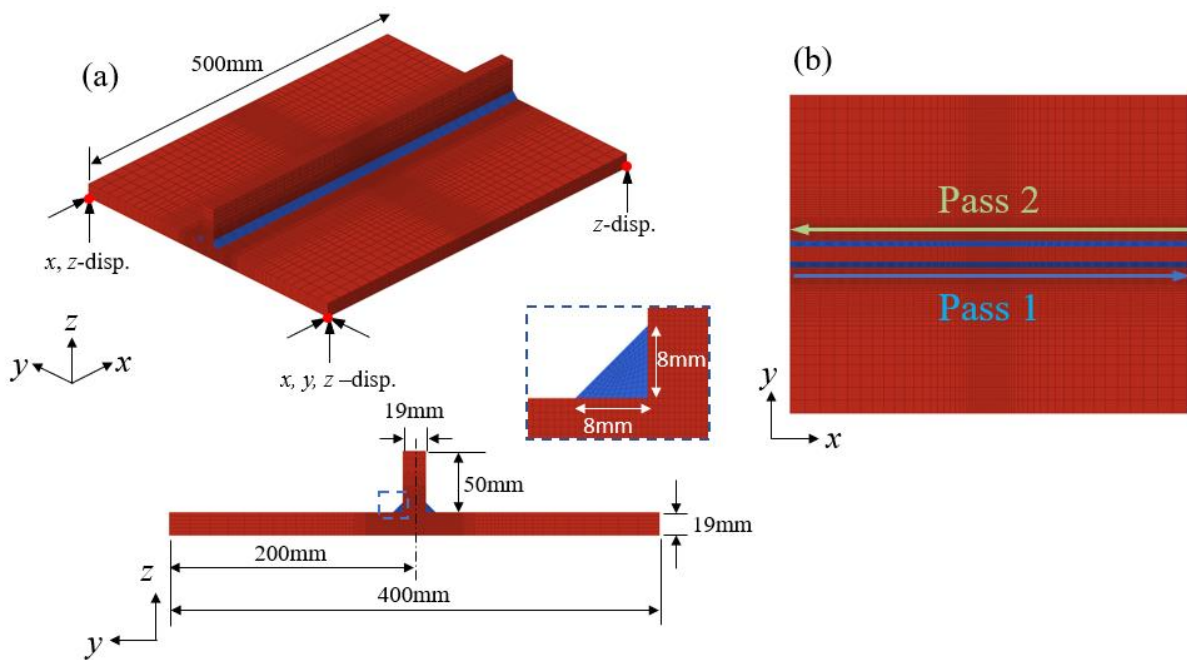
FE model for the welding simulation. (a) Constraints and weld profile of the FE model, and (b) Welding sequence used in the analysis.
